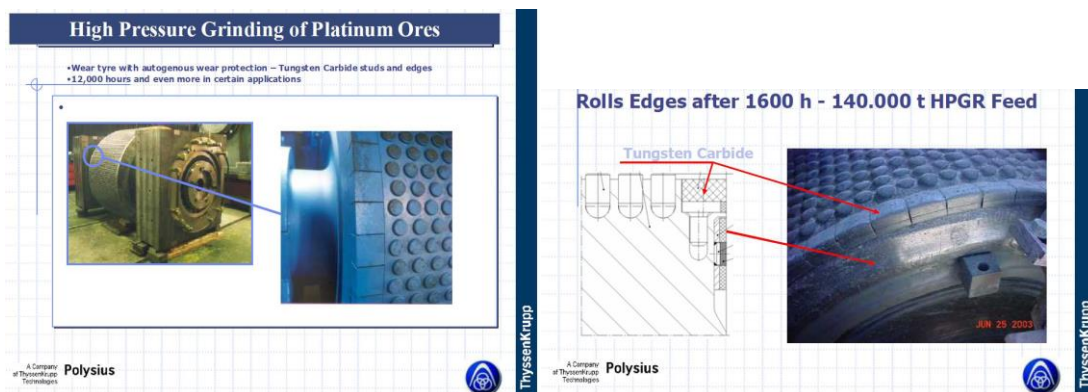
Diagrams/photographs showing the Polysius HPGR roller studded surface and edge assembly.
